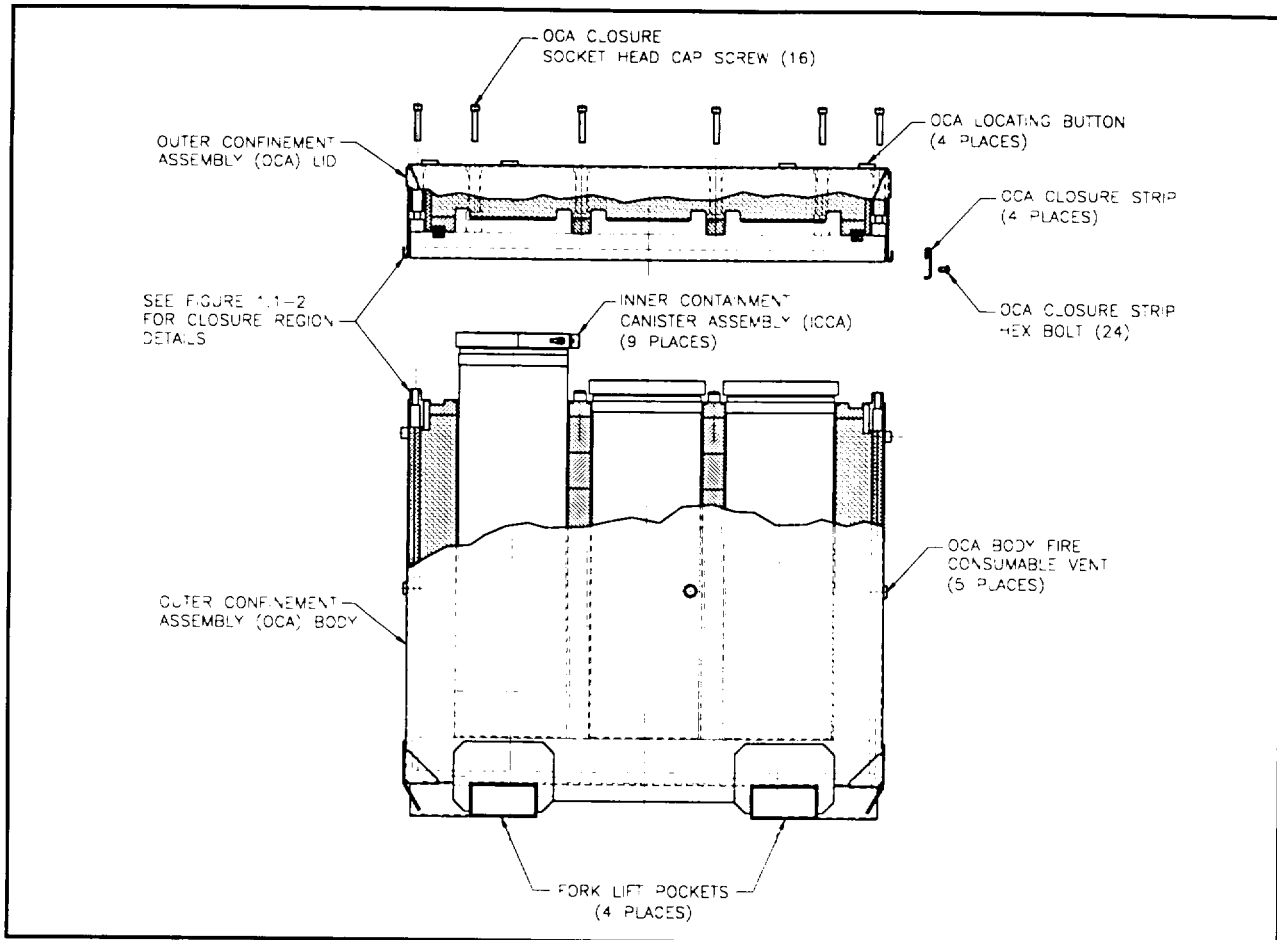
Sectional View of the GNF NPC Packaging
